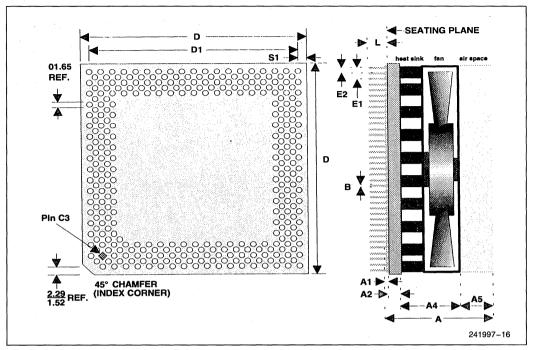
Future Pentium® OverDrive® Processor Package Dimensions
